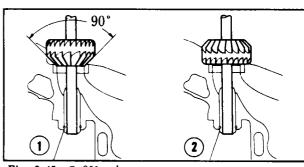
1 90° valve seat cutter 2 Flat valve seat cutter
